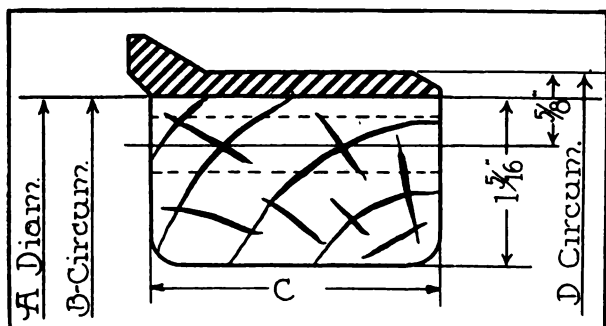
Showing Dimensions to Be Considered in Replacing Clincher Rims with Demountable.
